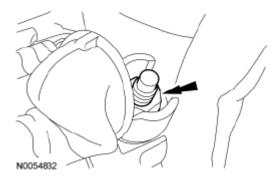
Locating Generator B+ Cable Courtesy of FORD MOTOR CO.
